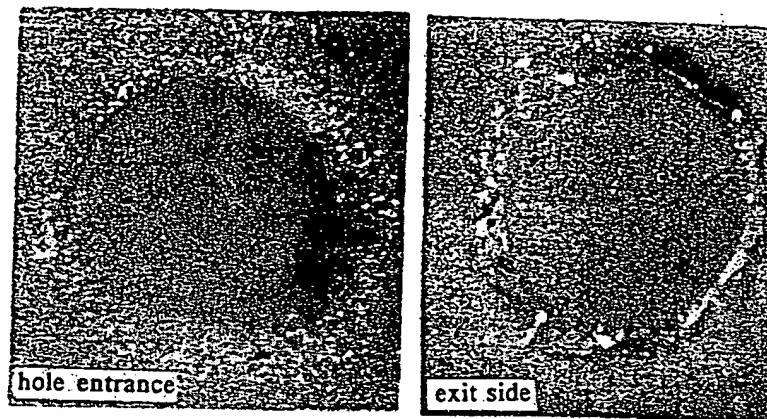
Blasting at hole entry and chipping at hole exit for glass piercing with improper AWJ conditions
